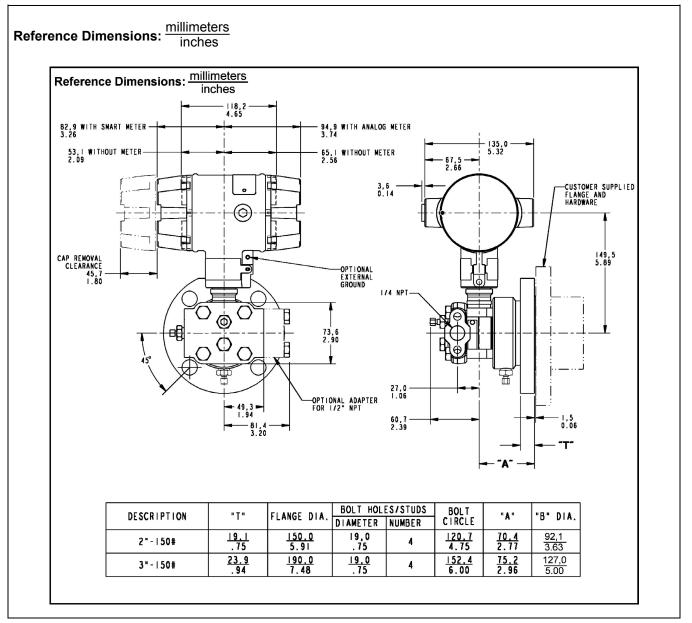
Approximate mounting dimensions for pseudo flange type models STF12F, STF13F, and STF14F.
